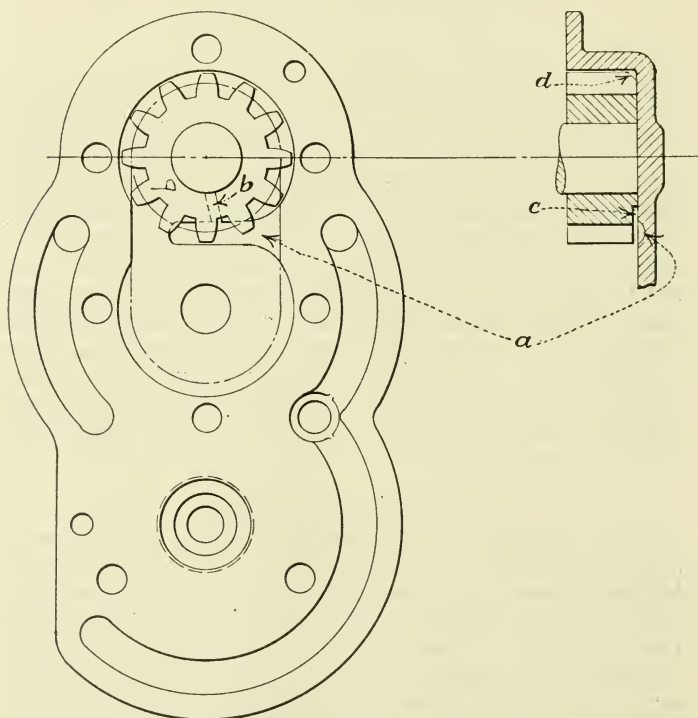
THE GEAR-PUMP THAT CIRCULATES THE LUBRICATING OIL IN THE PACKARD ENGINE
